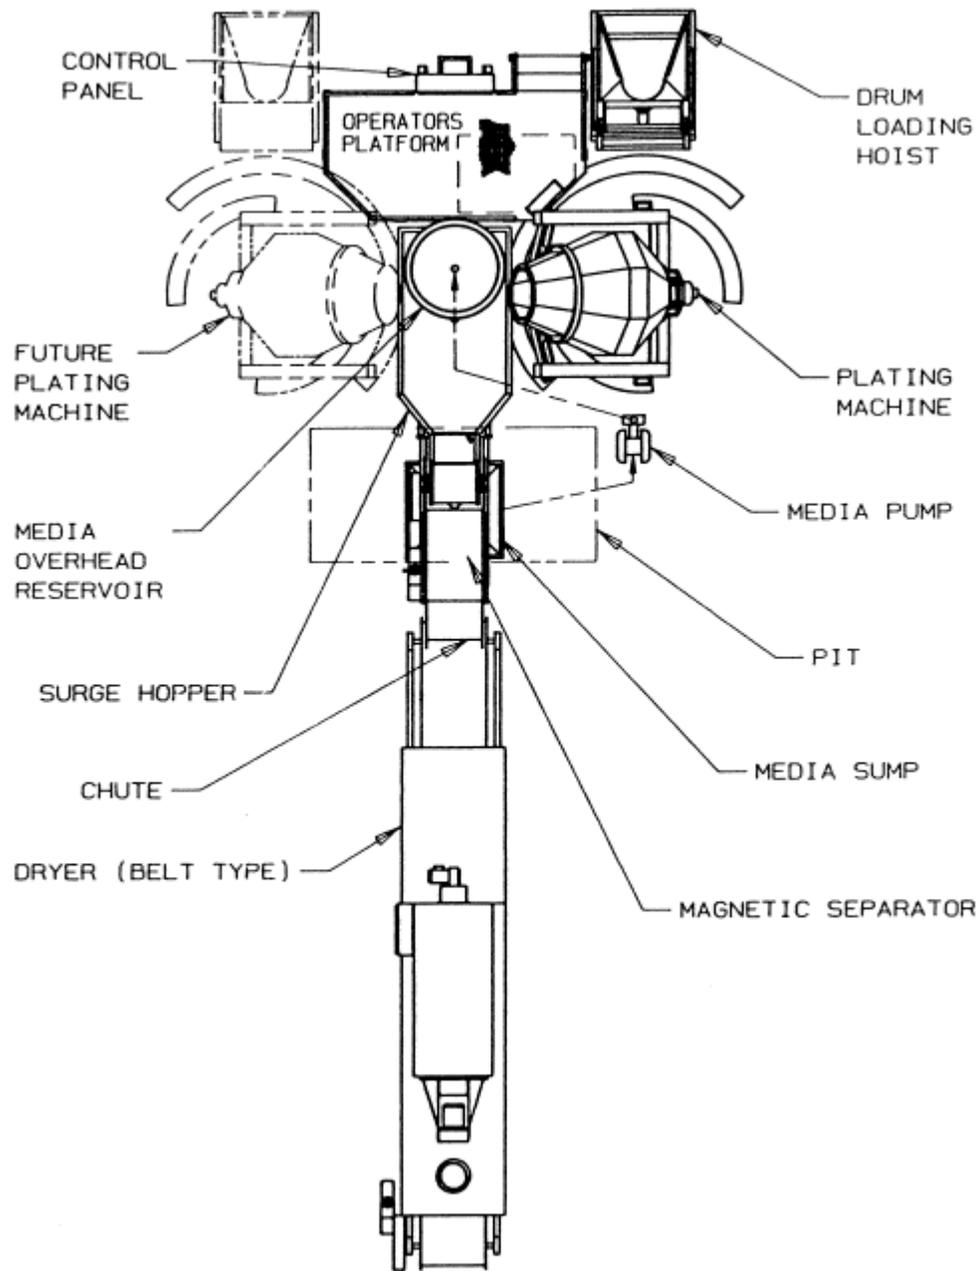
The Alloy MP-ACQ fastener coating system equipment.
